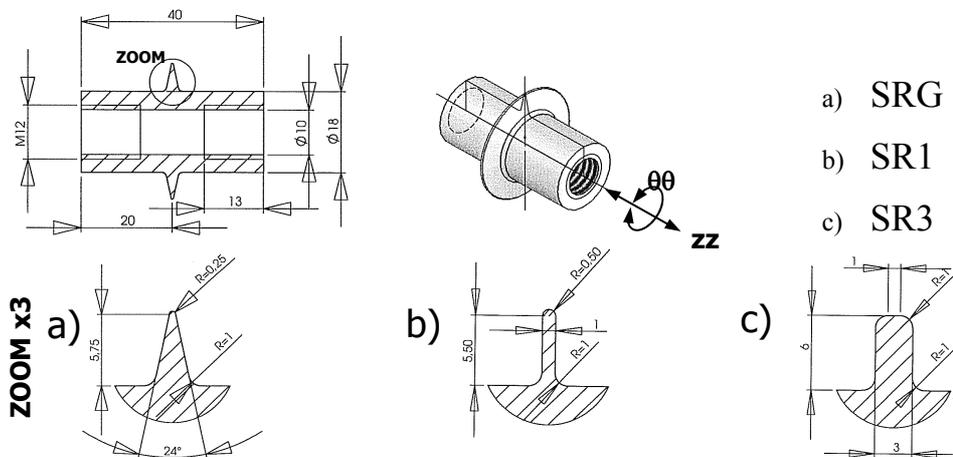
Typical thermal fatigue specimens (dimensions: mm)
